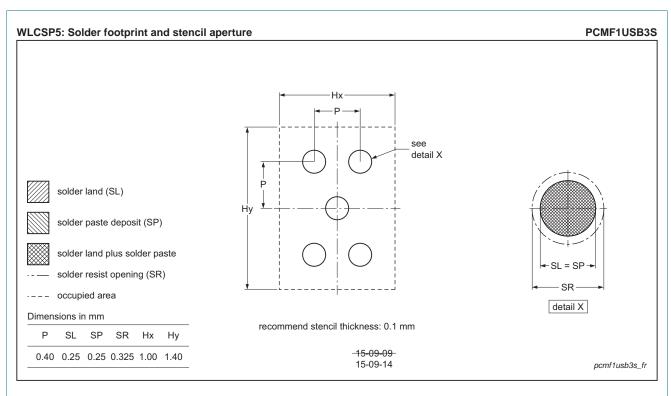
Soldering footprint WLCSP5 (PCMF1USB3S)
